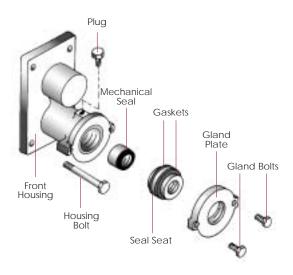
External Mechanical Seals are used to isolate the seal body from the liquid being pumped or when pumping liquid under vacuum conditions.
